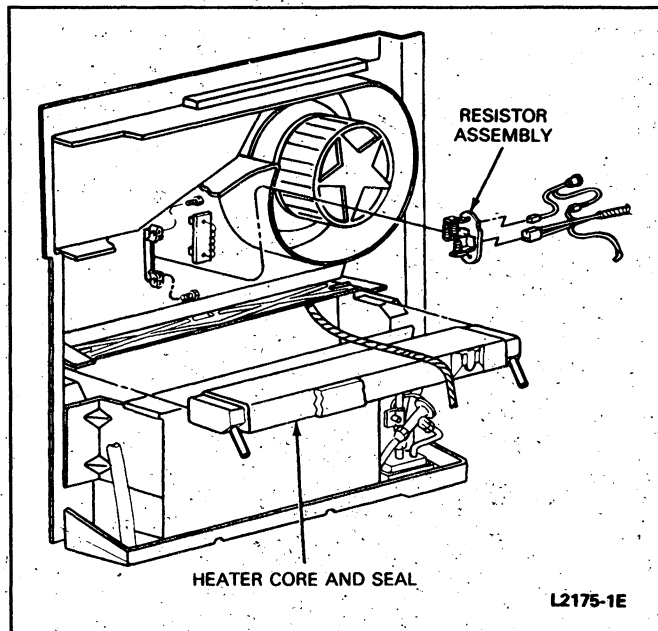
Super Club Wagon Auxiliary Duct Assembly
